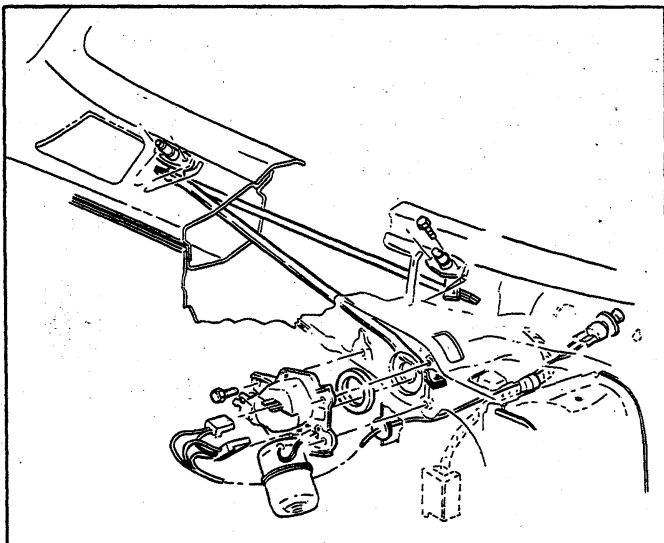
Wiper and Motor Linkage—Chevrolet
